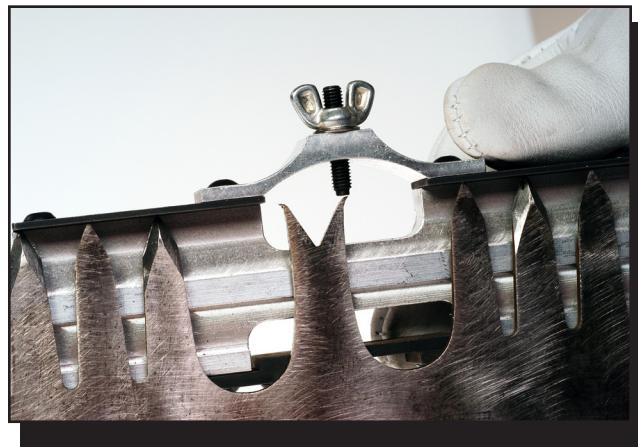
The pin on the raker gauge can be adjusted to the desired raker height.
